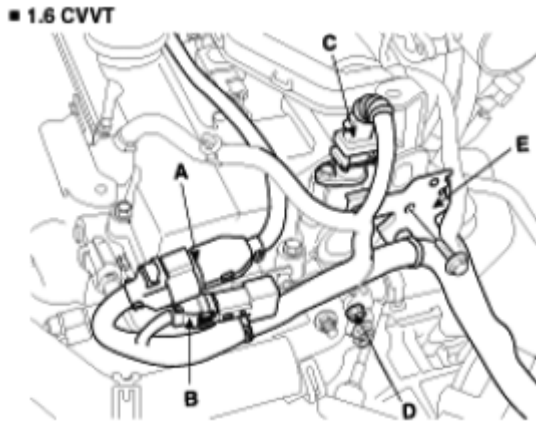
Identifying Ignition Coil Connector, Ignition Coil Condenser Connector And CMP (Camshaft Position Sensor) Connector
